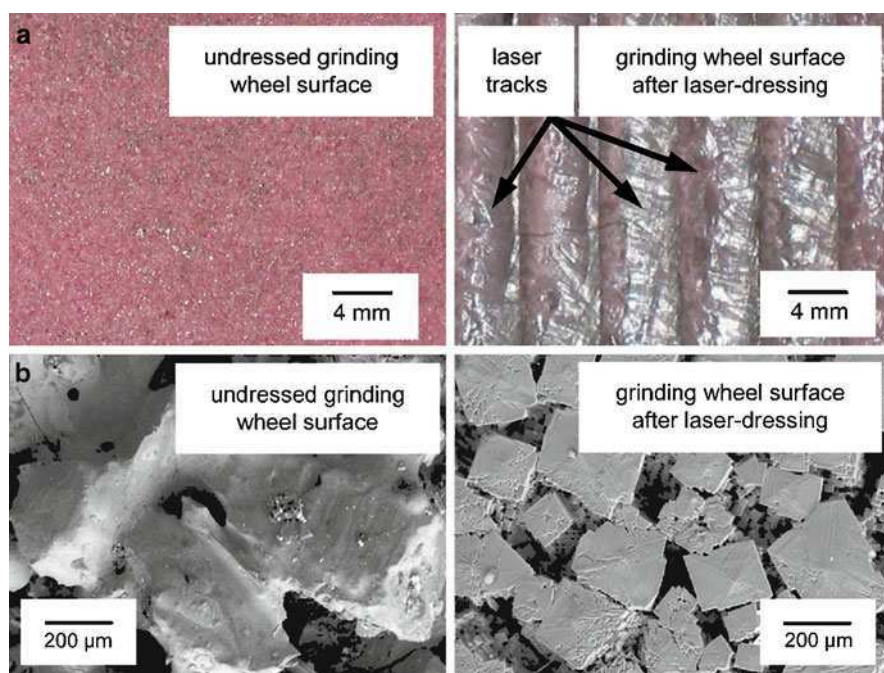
Vitrified alumina grinding wheel surface before laser dressing (undressed) and after laser dressing with 750 W: (a) Optical micrographs of the grinding wheel surface, (b) Microstructure of the grinding wheel surface [64] used with permission copyright Elsevier
